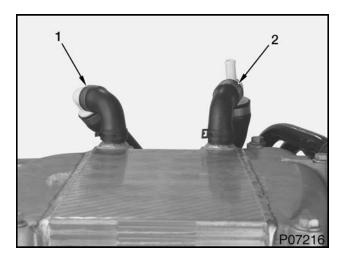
High Pressure Charge Air Cooler (HPCAC) coolant pipe connections
